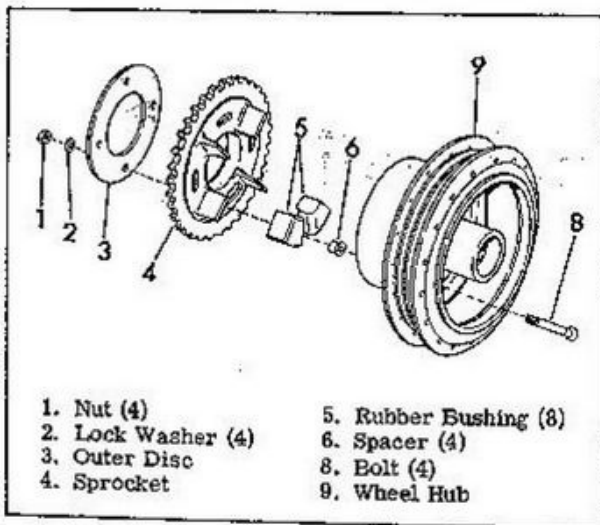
C-40A. Removing and Installing Rear Wheel Sprocket (1970 & Later)
